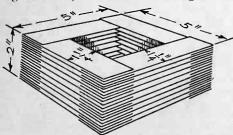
Dimensions of Core for Battery Charger Transformer.
